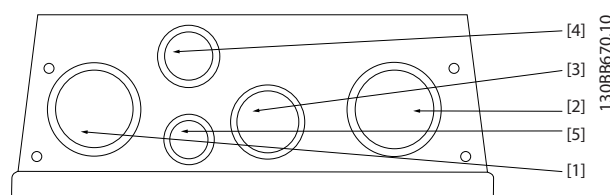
B2 - IP55 Threaded Gland Holes
